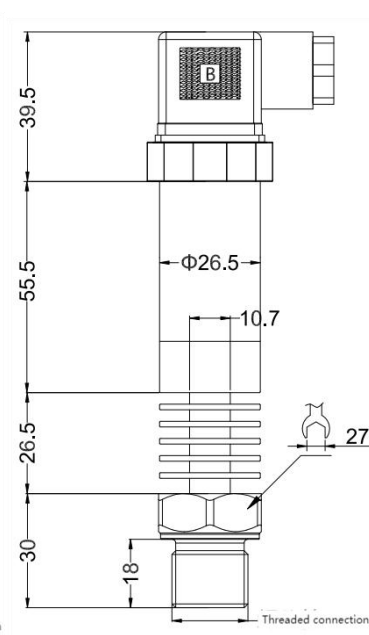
Dimensions of the high-temperature pressure transmitter with 5 heat sinks (unit: mm)
